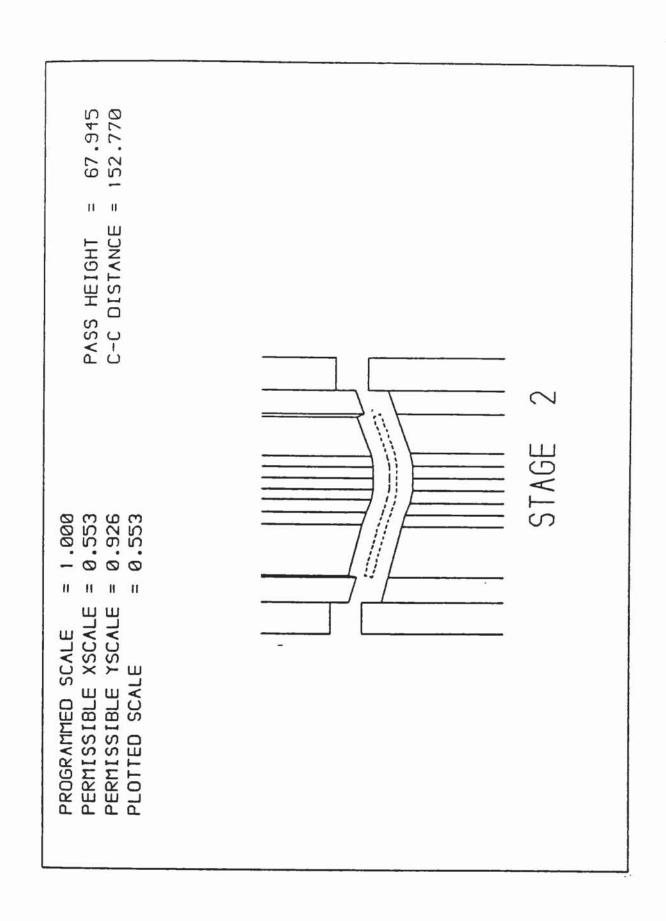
ROLL DRAWING TOP AND BOTTOM ROLLS
